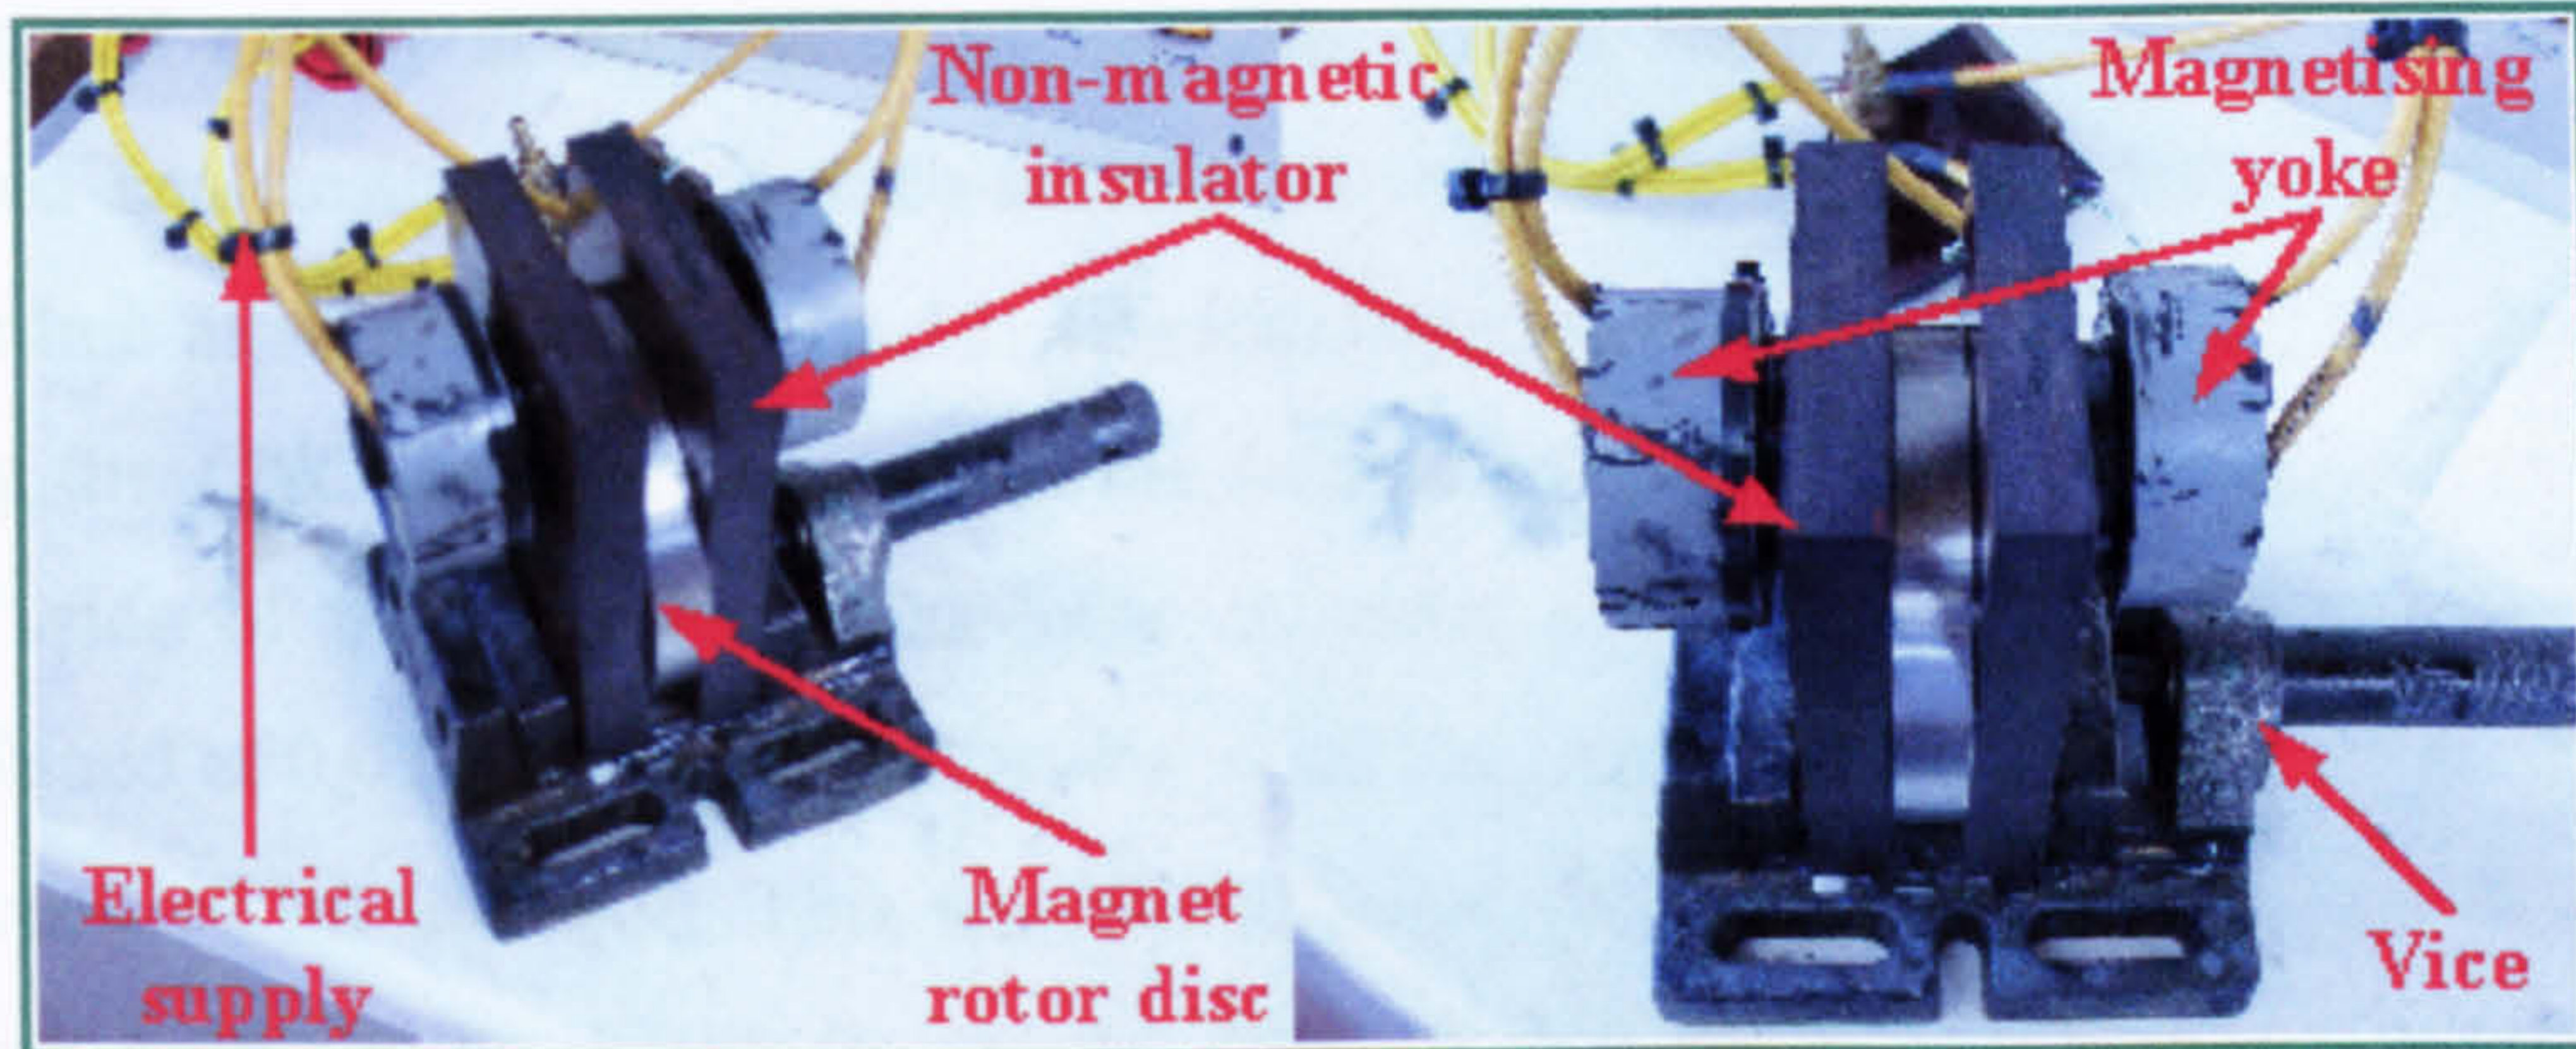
Magnetising the high speed magnet rotor disc using a new magnetising fixture
